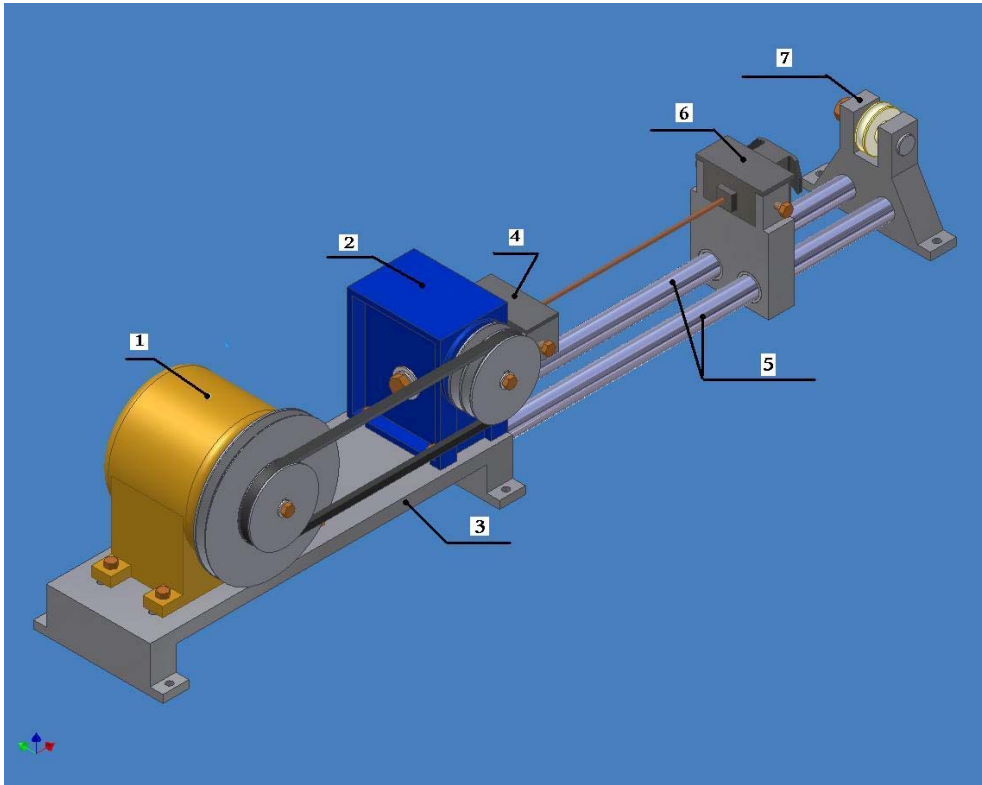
Device scheme: 1. electromotor, 2. gear box, 3. left console for gear box and electromotor, 4. rotary shattering head, 5. line slide way, 6. sliding shattering head, 7. tensile mechanism
